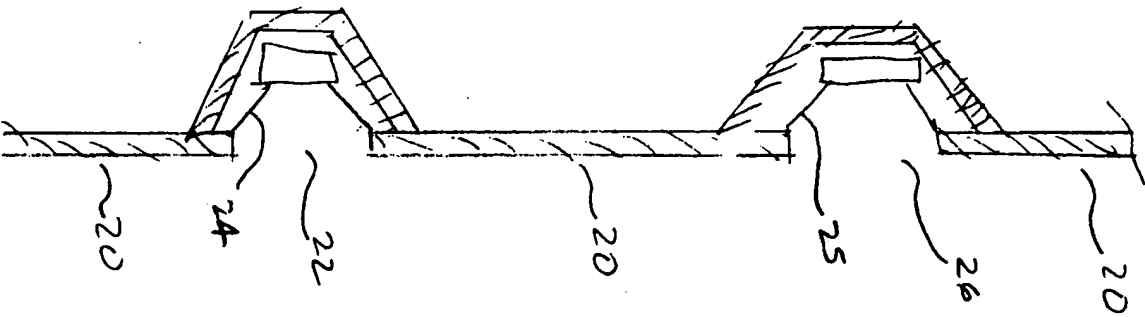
is a cross-sectional view of the device of FIG. 1, taken along line 6-6 of FIG. 1, showing the device in a closed position. The device includes a housing 20, a piston 22, a spring 24, a valve 25, and a seal 26. The piston 22 is biased by the spring 24 to the closed position, where the valve 25 is closed and the seal 26 is engaged. The housing 20 is shown in cross-section, and the piston 22 is shown in cross-section. The spring 24 is shown in cross-section, and the valve 25 is shown in cross-section. The seal 26 is shown in cross-section.
